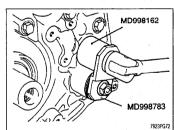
Use the special socket and holder to remove the balance shaft plug—2.0 engine
